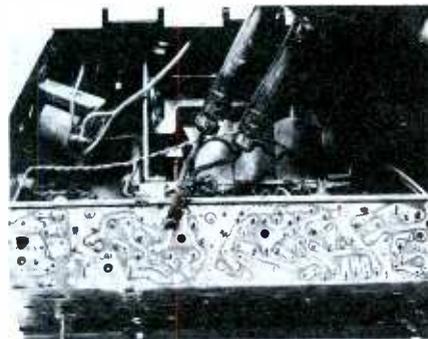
With foil on both top and bottom of etched board, extra heat is required.
